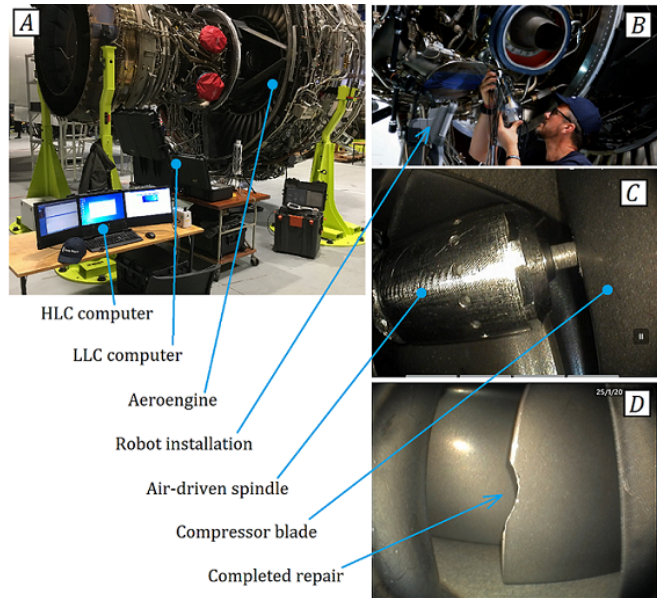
Remote boreblending demonstration carried out on a training aeroengine: A. setup and establishing of internet connection, B. ground support attaching robot to aeroengine, C. robot machining compressor blade and D. finished stress relief blend
